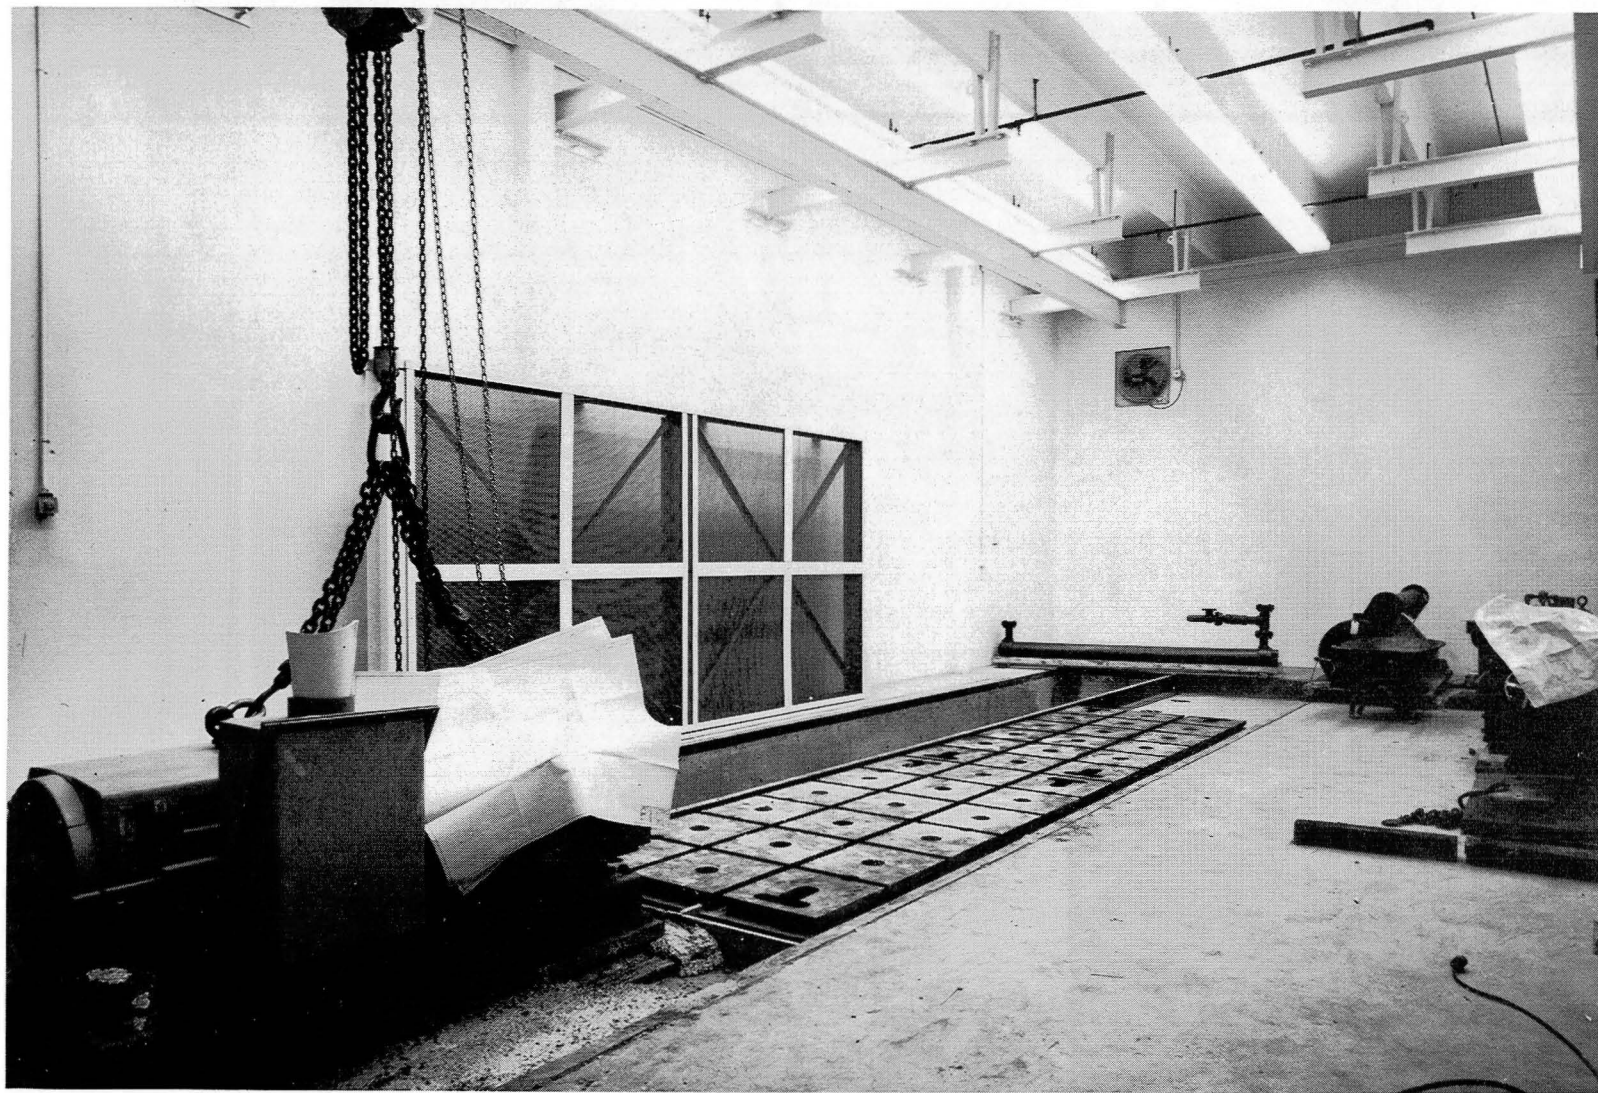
View of Motor Baseplate Grouted in Place Before Grouting of Floorplate
